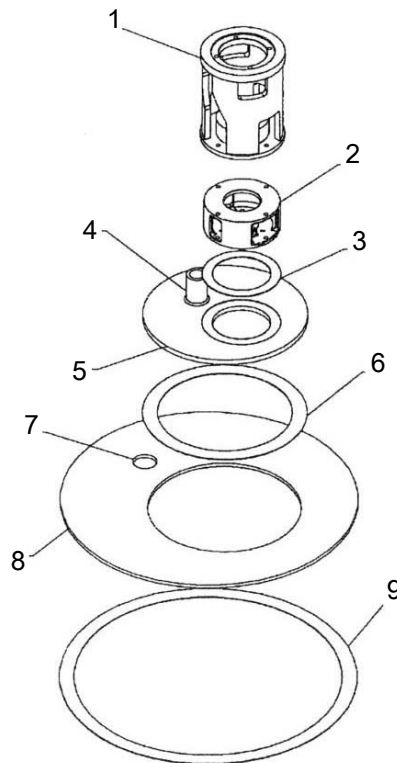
Layout for a standard support plate with the vapor-proof option
